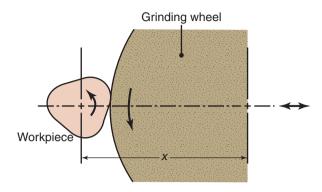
Schematic illustration of grinding a noncylindrical part on a cylindrical grinder with computer controls to produce the shape. The part rotation and the distance *x* between centers are varied and synchronized to grind the particular workpiece shape.
